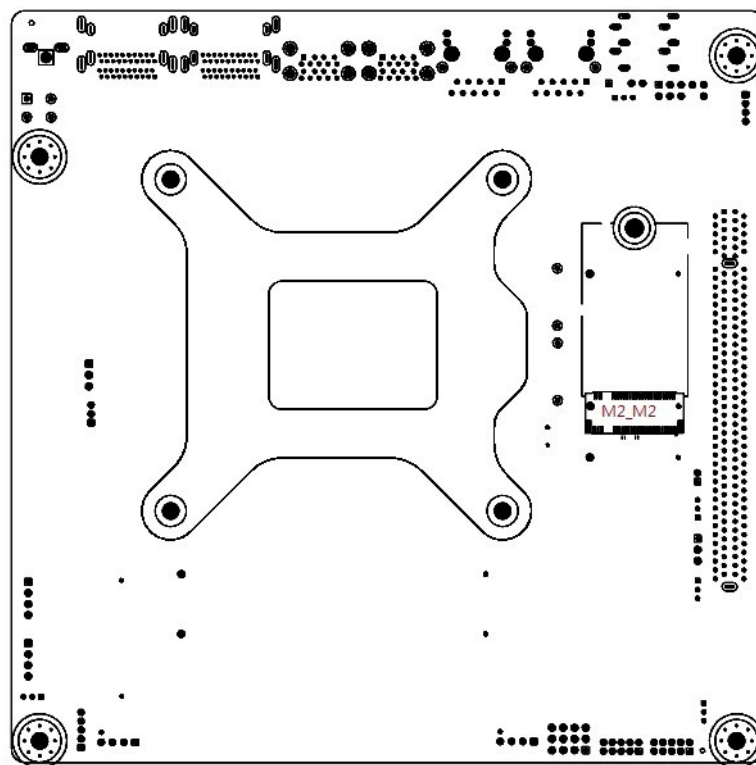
Jumper and Connector Locations (Bottom Side)
